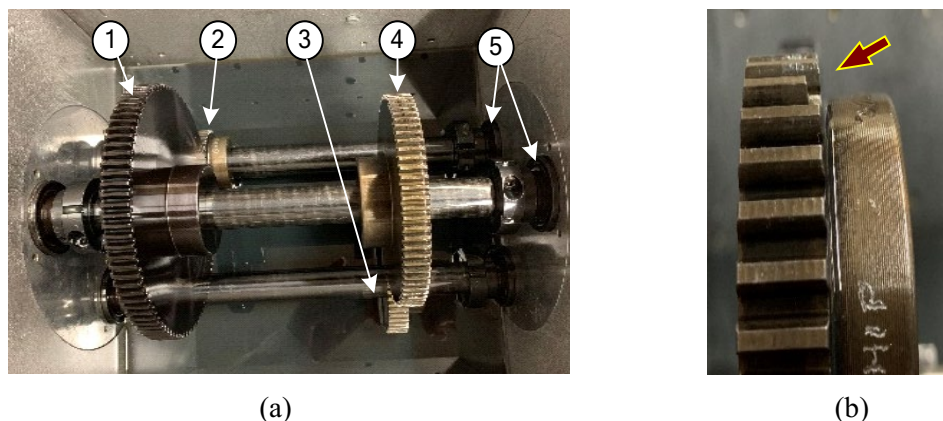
(a) A two-stage gear system: (1) input gear; (2) input pinion; (3) output pinion; (4) output gear (5) the roller bearings. (b) A simulated damaged gear with one partially broken tooth (chipped gear).
